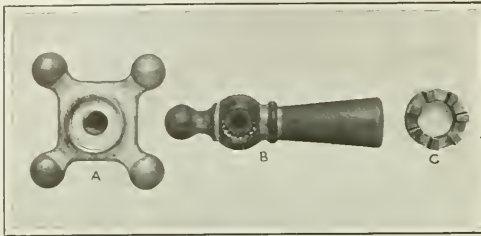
Faucet Handles and Roller Bearing Cage made by the Die-casting Process
